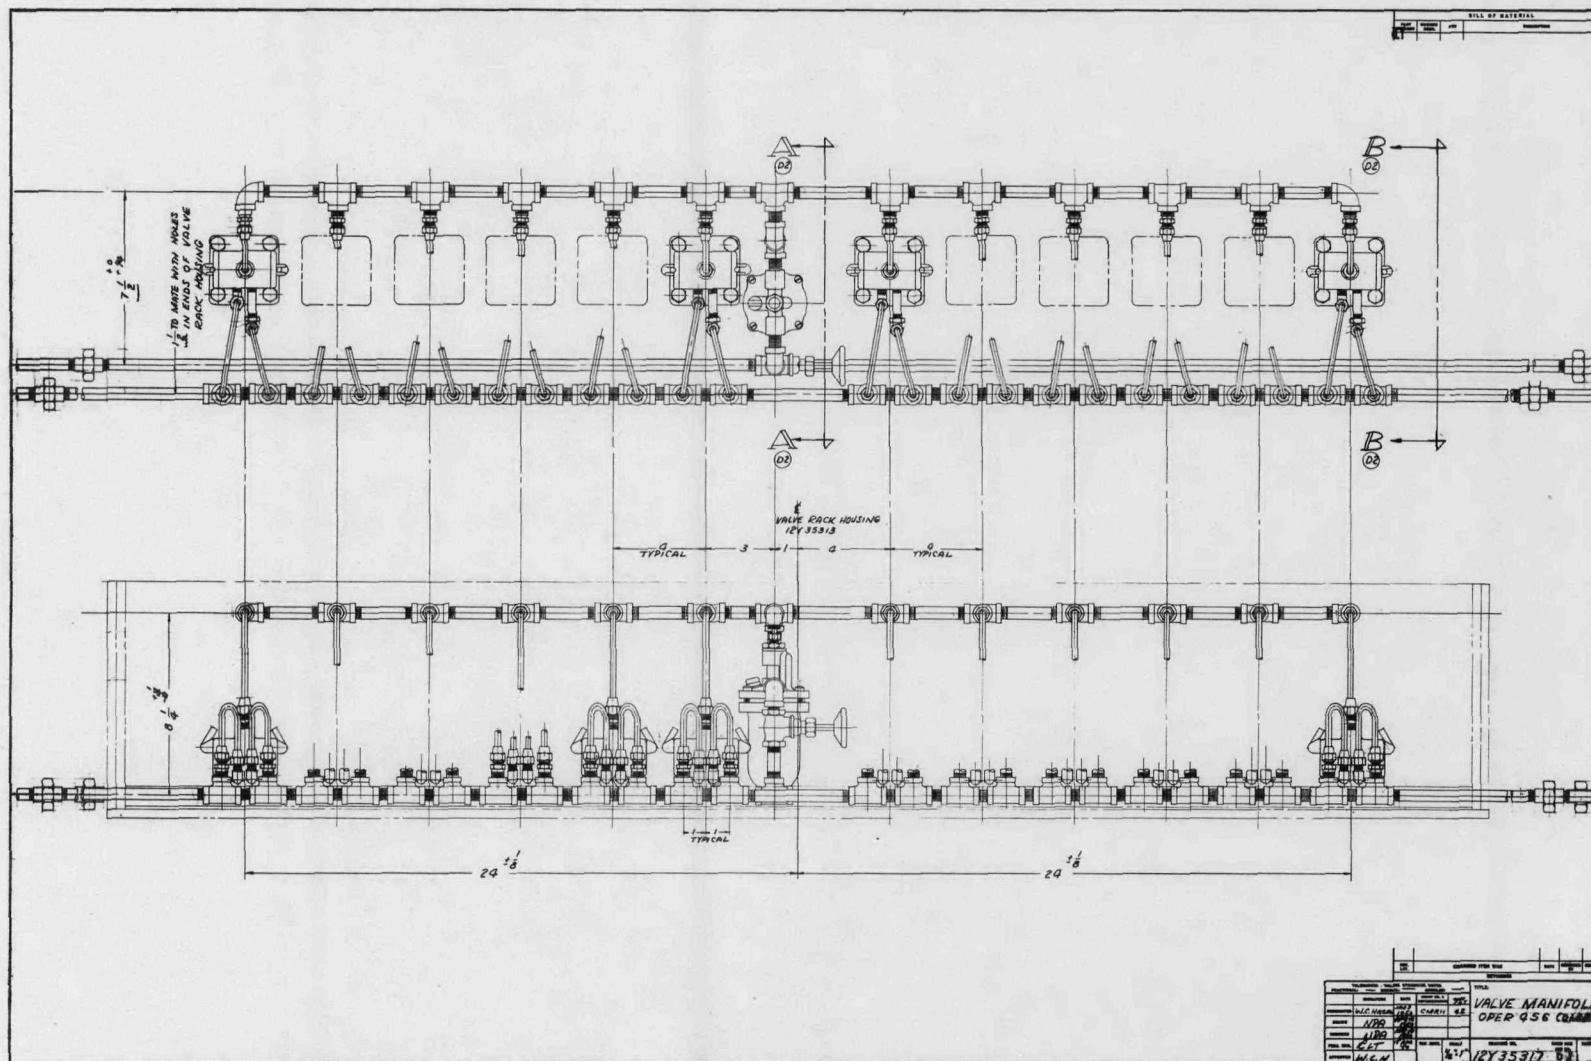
Design layout of solenoid valve rack for control of air cylinder.
